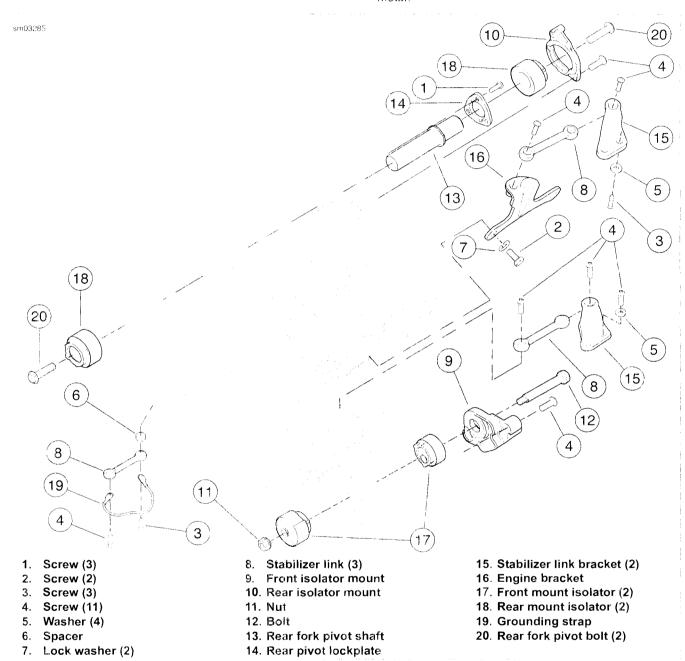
Engine Mounting Assemblies: All Models (typical)
